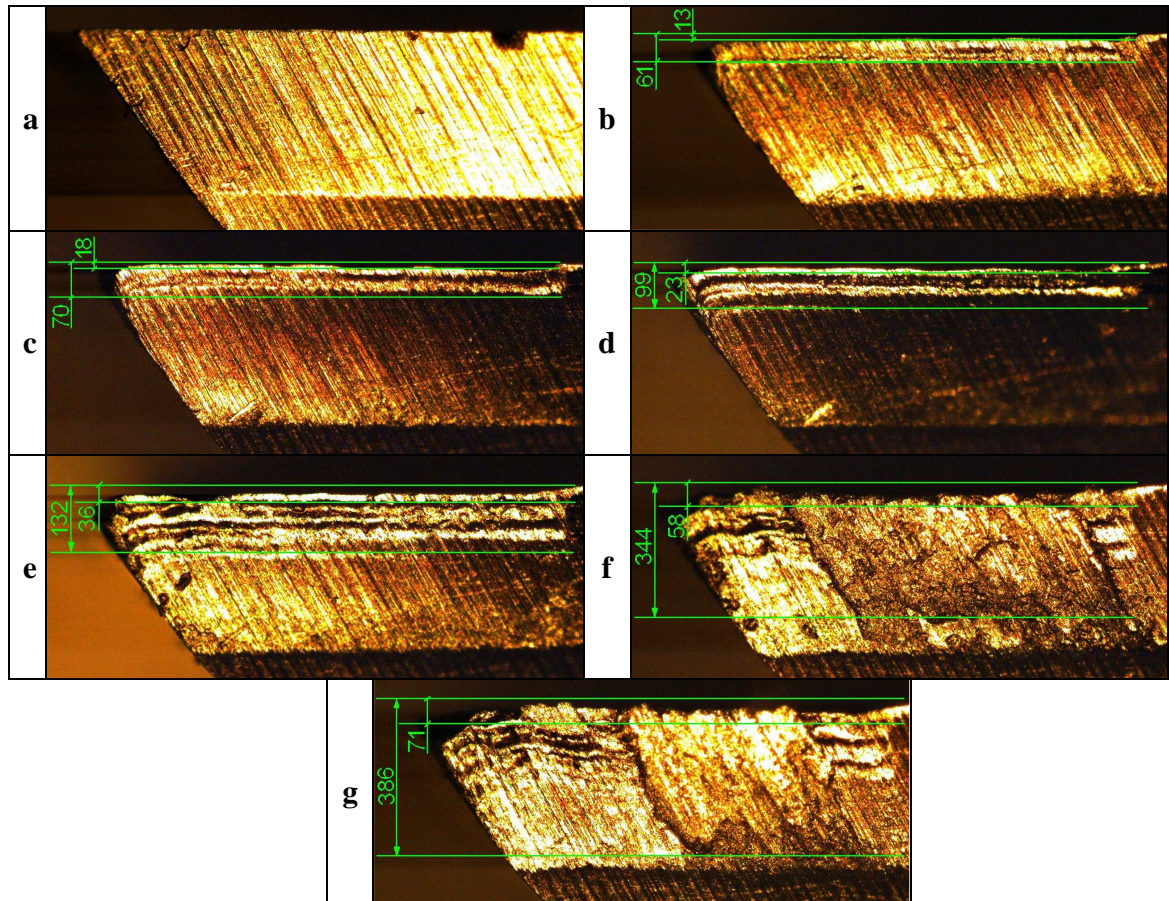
MTE 9mm end mill tooth # 3 linear toolpath clearance face wear a) Fresh tool, b-g) After pass 1-6 (each 162 mm length, 9 mm width, 1 mm depth).
